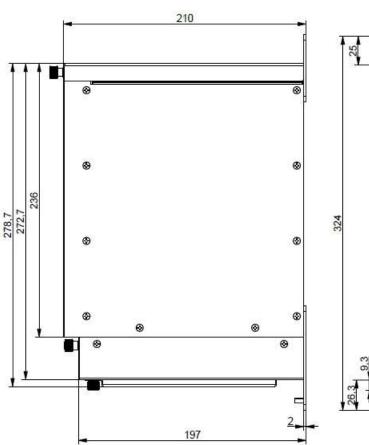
Dimensions: detail key hole (KBox C-103-NGSF with fan tray option)
